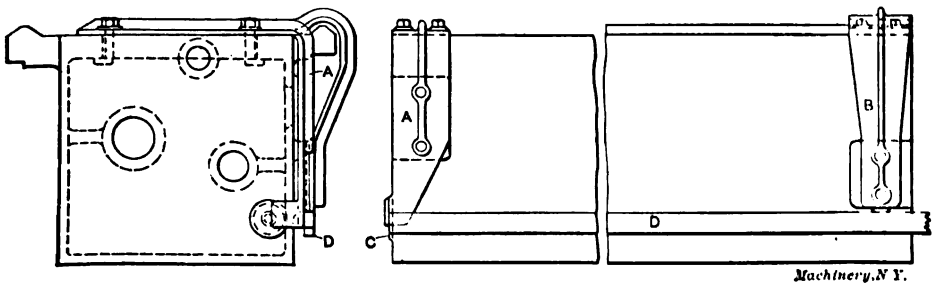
Jigs used for Drilling Lead-screw Box Bolt Holes in the Bed
